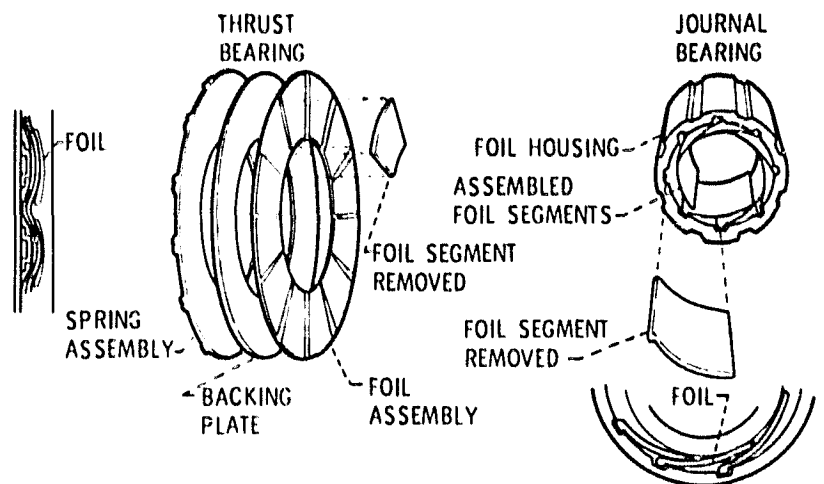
Cantilevered foil bearings (Garrett Corp.), (From ref. 56).
